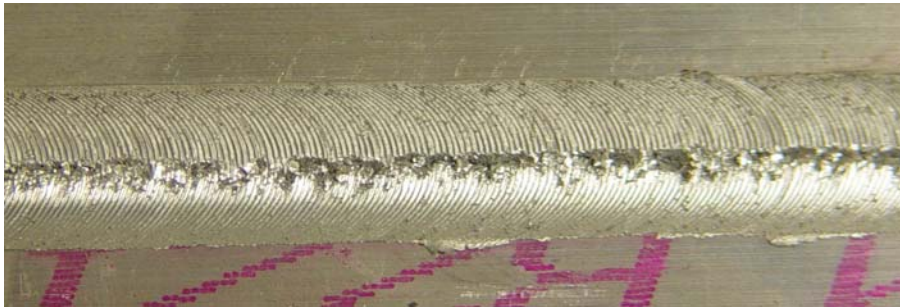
Weld Surface for 6000 rpm and 90 ipm.
